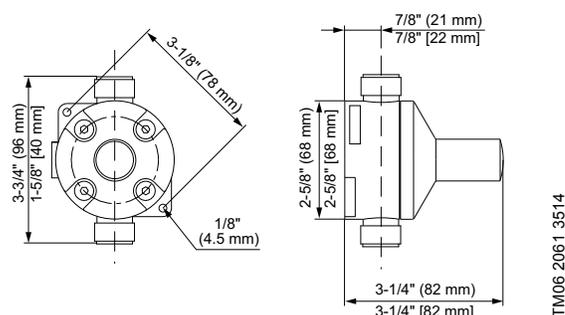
Pressure loading valve. Dimensions in brackets apply to stainless-steel version.
